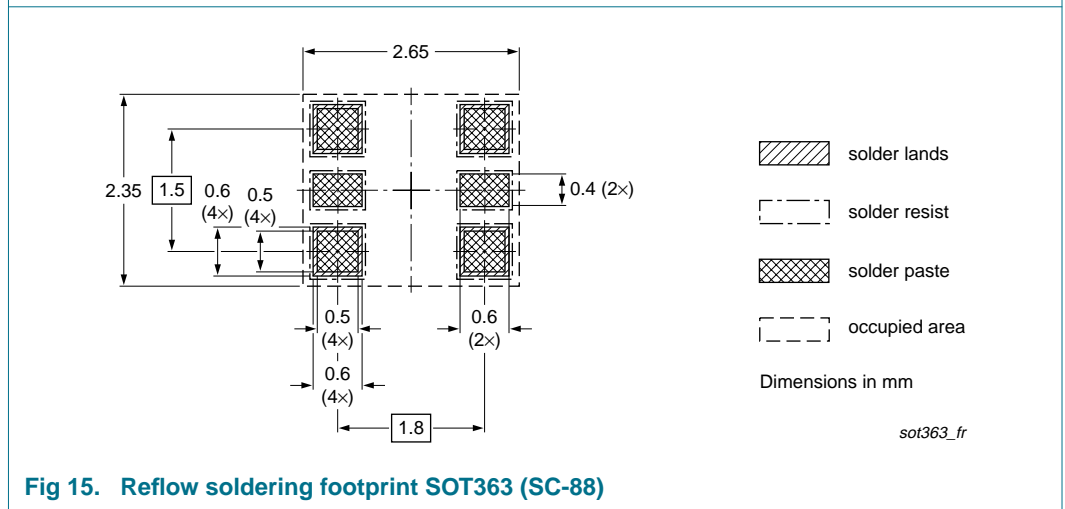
Reflow soldering footprint SOT363 (SC-88)
